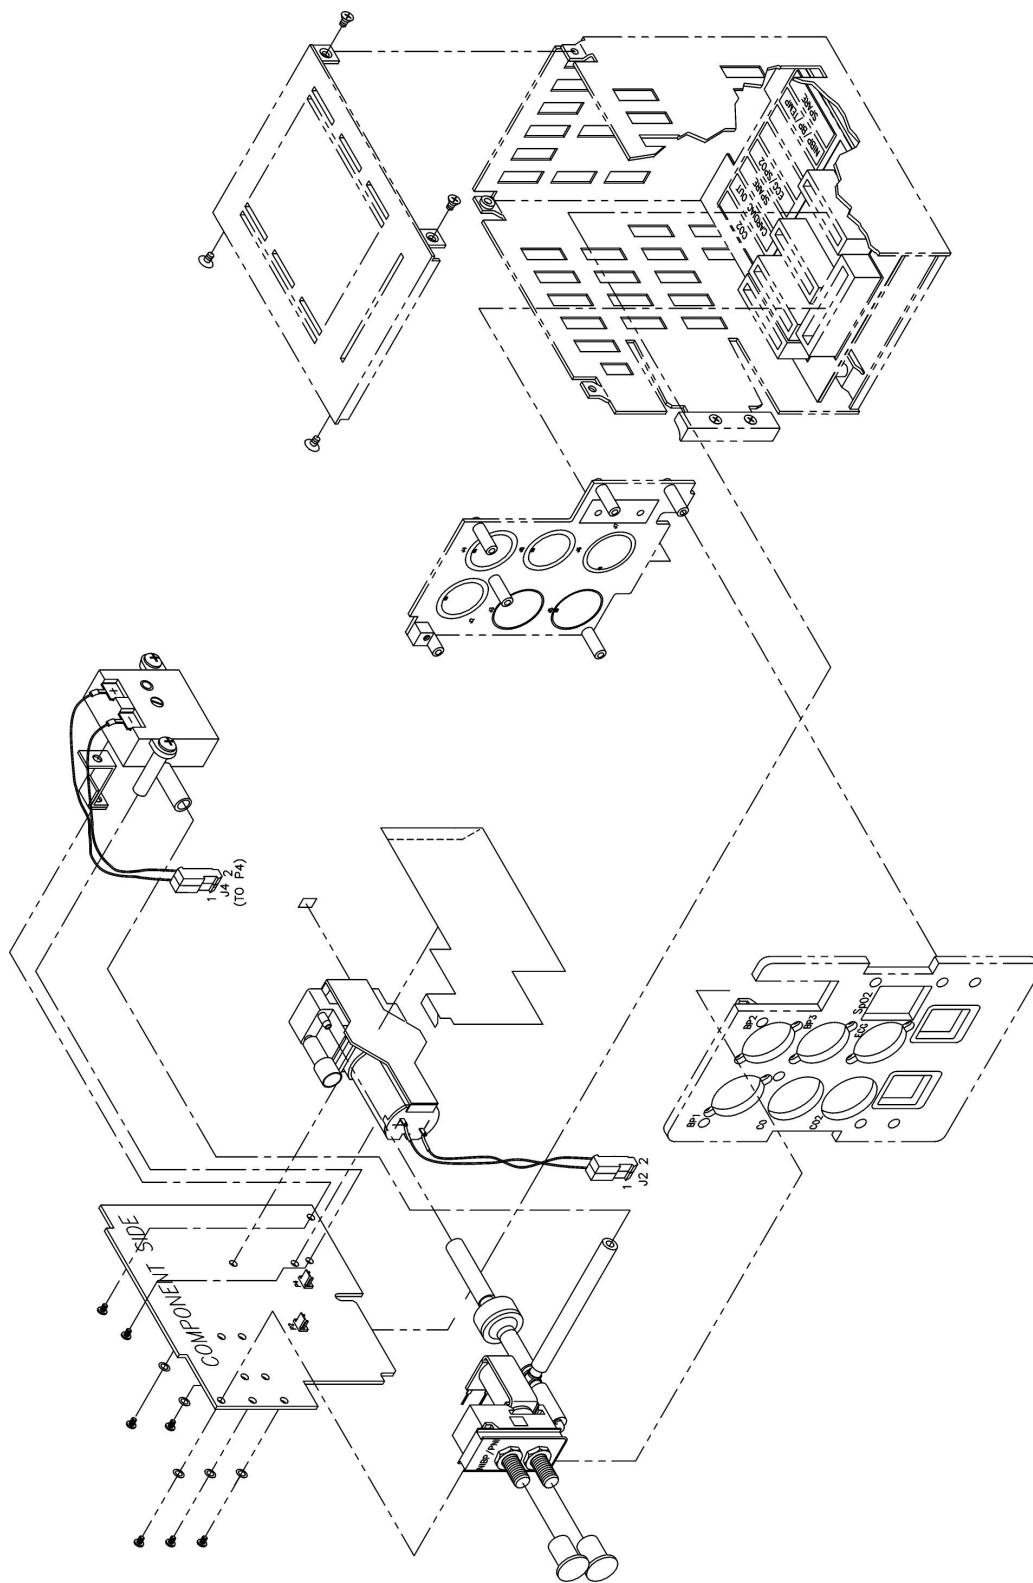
NIBP/BP/TEMP Board with NIBP Pneumatics (Exploded View)
